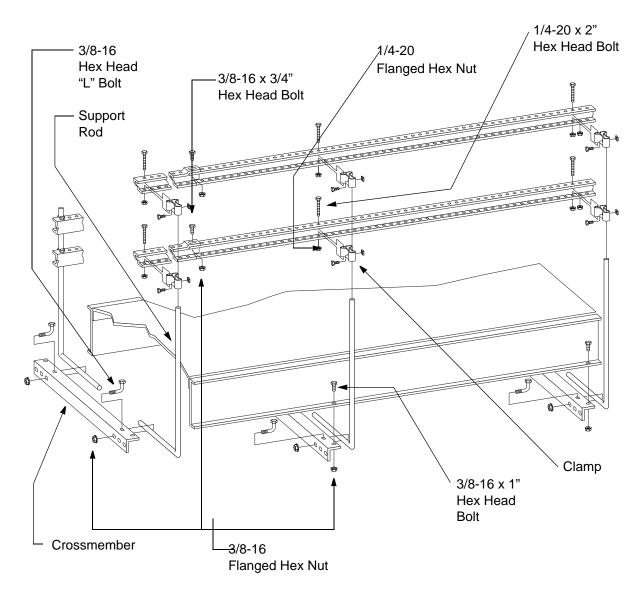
Double Channel Adjustable Side Guide (Exploded View)
